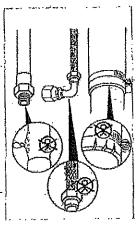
HOSES AND FUEL LINE INSPECTION
